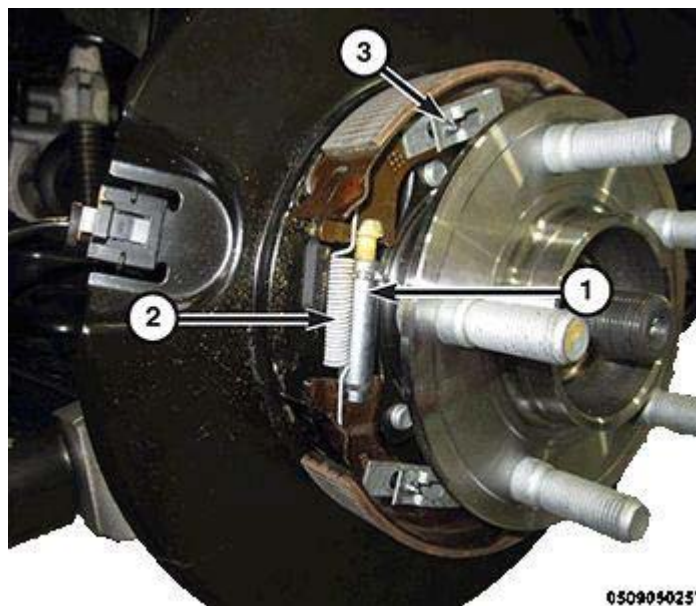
Parking Brake Shoe Adjustment, Adjuster Spring & Adjuster
